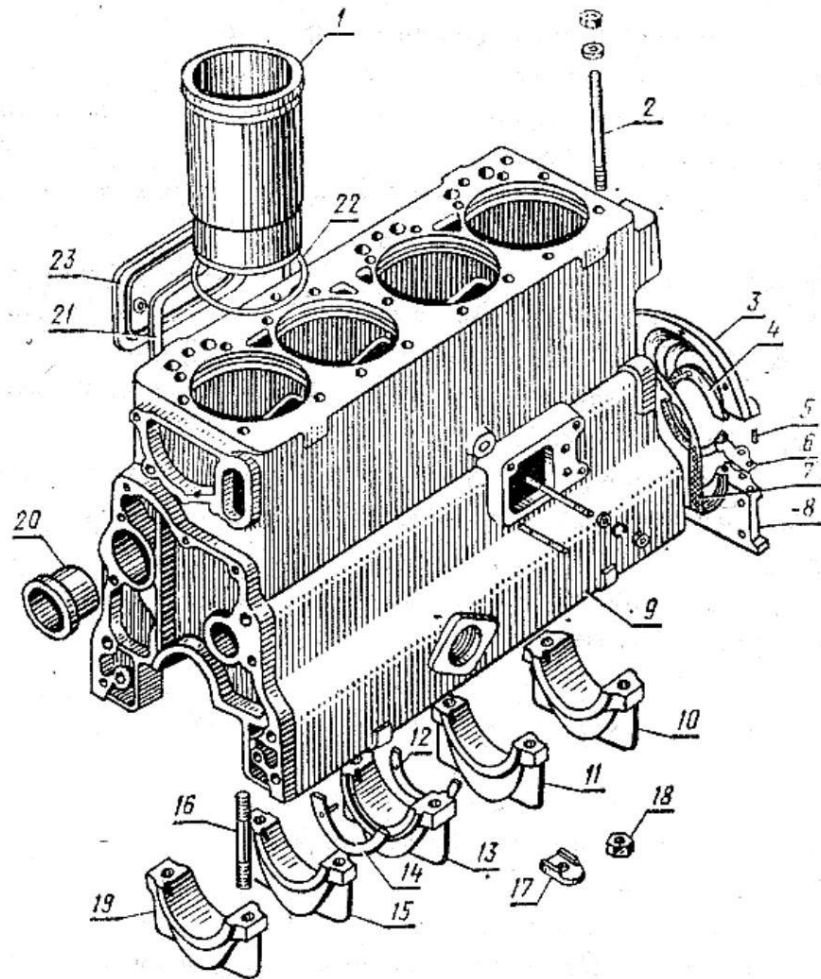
Block-crankcase of the SMD-14 engine 1-cylinder liner; 2-pin; 3-upper housing fastener; 4-socket; 5-pin; 6 and 7-gasket; 8-lower housing fastener; 9-block crankcase; 10,11,13,15 and 19-main bearing cap; 12 and 14-half rings; 16-pin; 17-washer; 18-nut; 20-distribution shaft bushing bearing; 21-side cover gasket; 22-cylinder sealing ring; 23-side cover.
